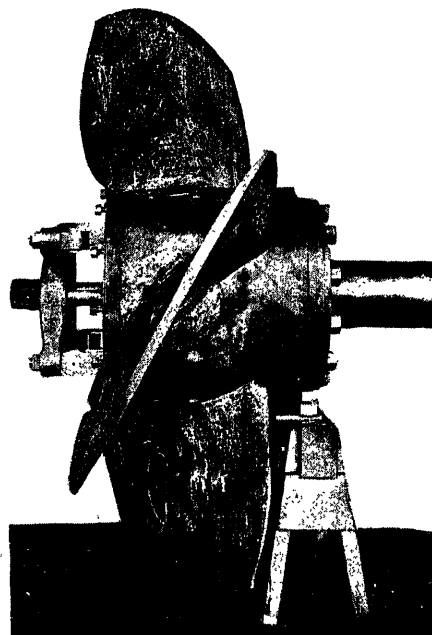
AXIAL FLOW TURBINE WHEEL WITH ADJUSTABLE BLADES—OPEN POSITION
